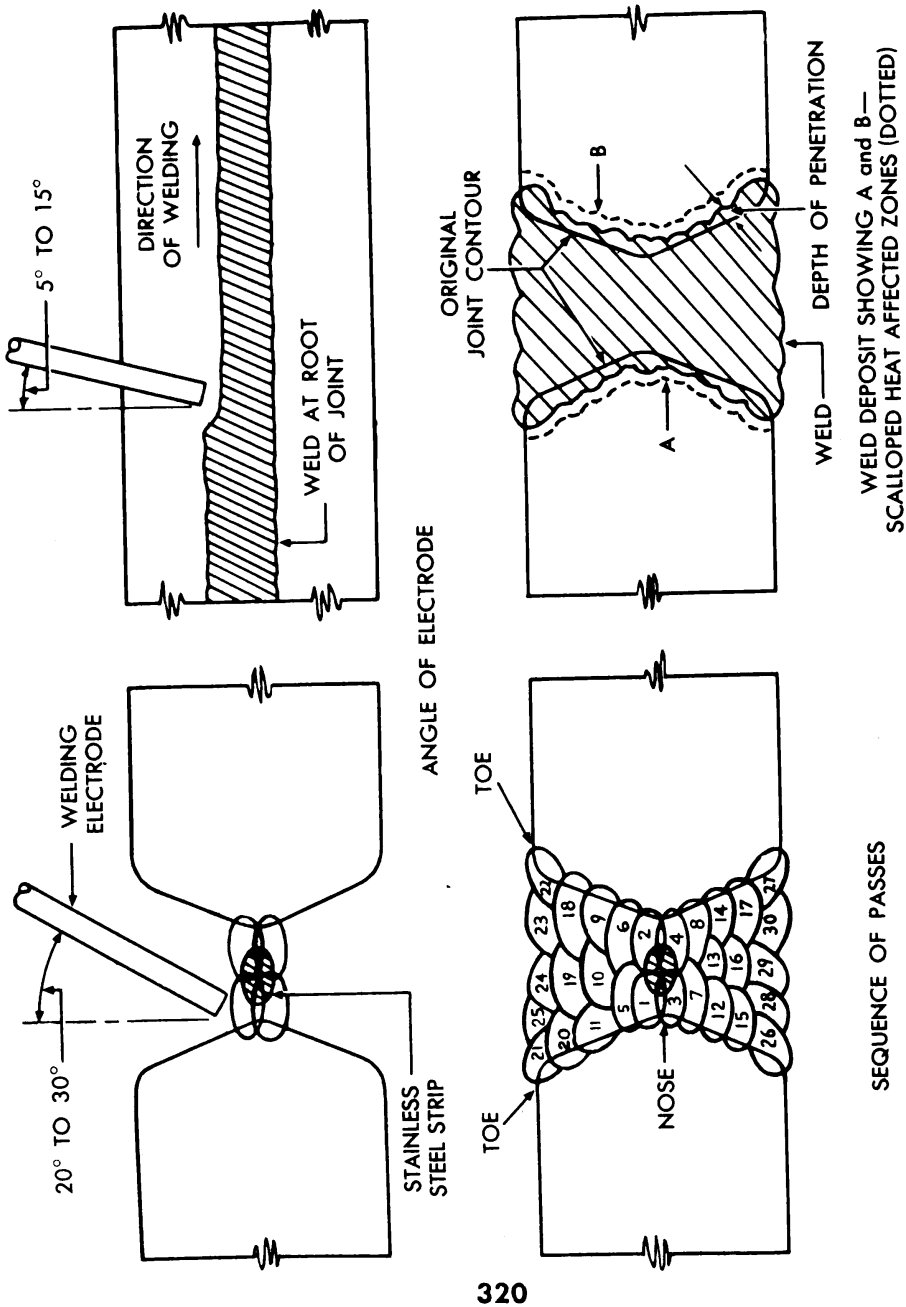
Double Bevel Weld on Homogeneous Armor Plate
